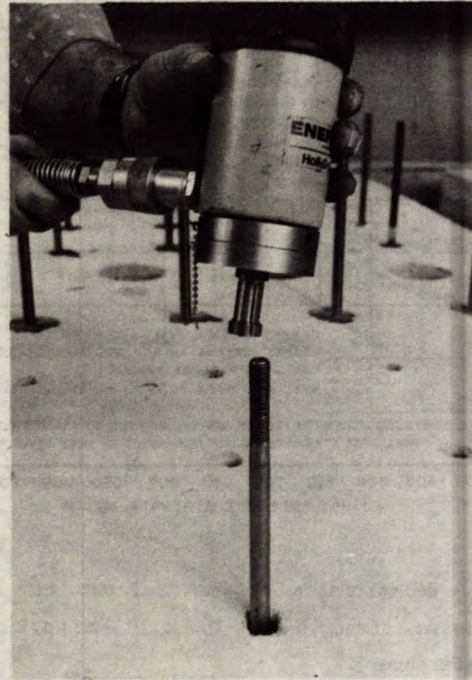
Equipment for split sleeve assembly technique; from reference 34
